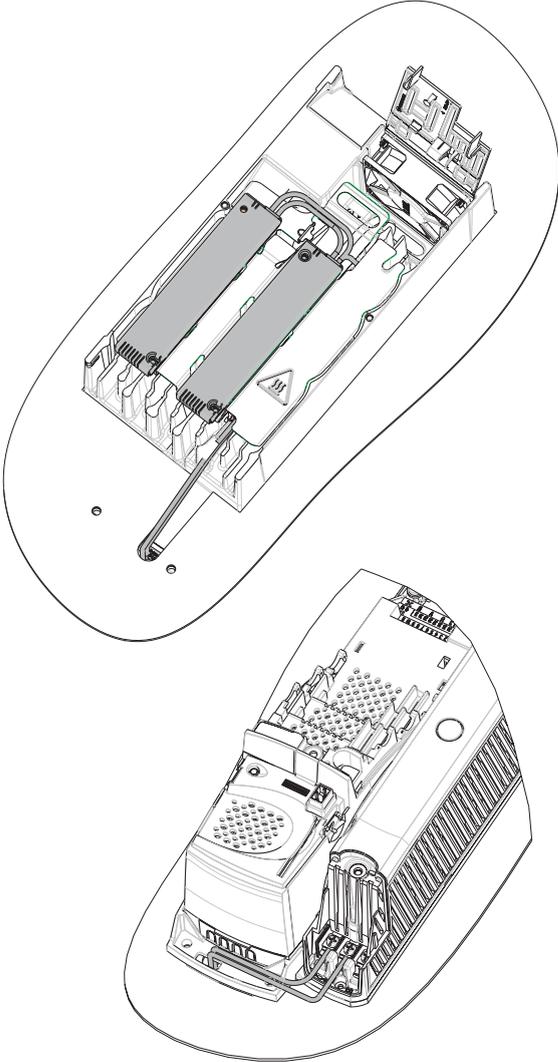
Fitting of the heatsink mounted braking resistors on size 2
